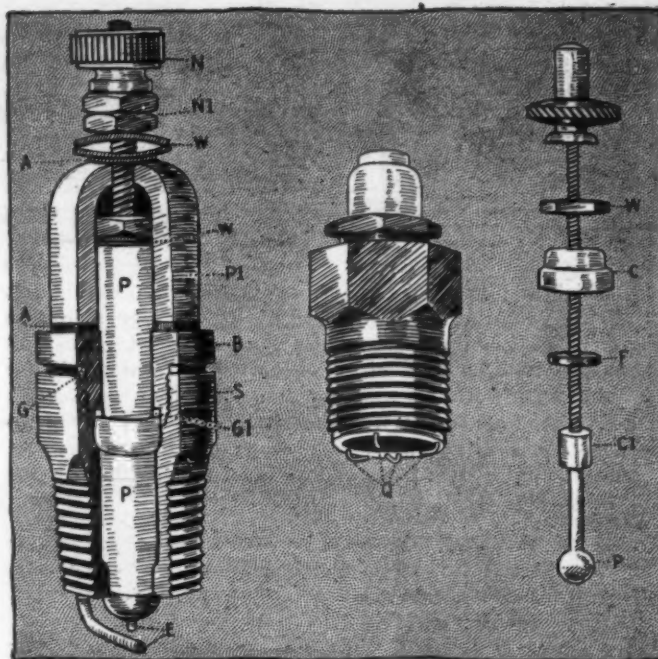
Part section Sturdy spark-plug. Fig. 5—Disassembled view of Flash Ball spark-plug
